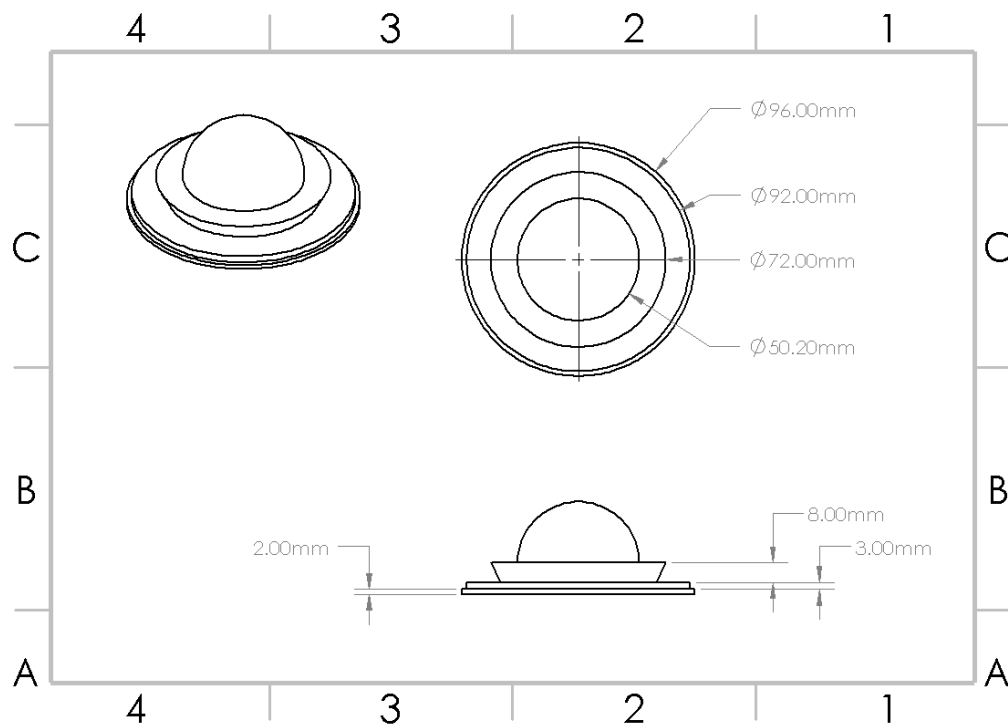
Technical drawing of the lower half mold negative used to create the lower silicone mold.
